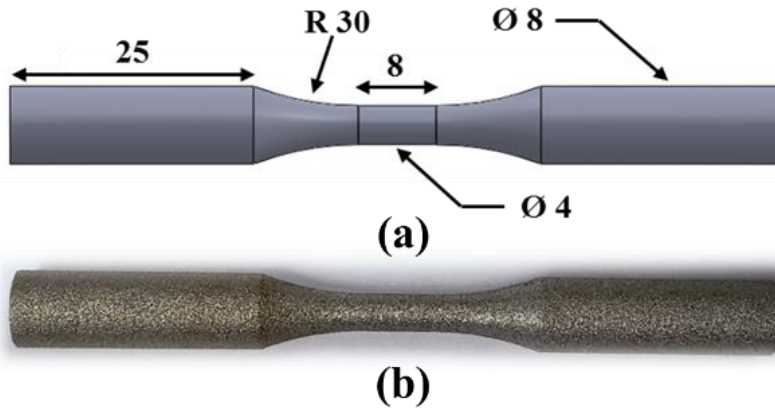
(a) CAD model of tensile sample geometry with dimensions in mm, (b) a typical printed sample
